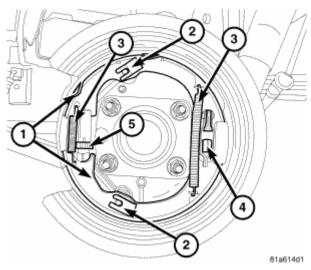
Identifying Brake Shoes Courtesy of CHRYSLER LLC
